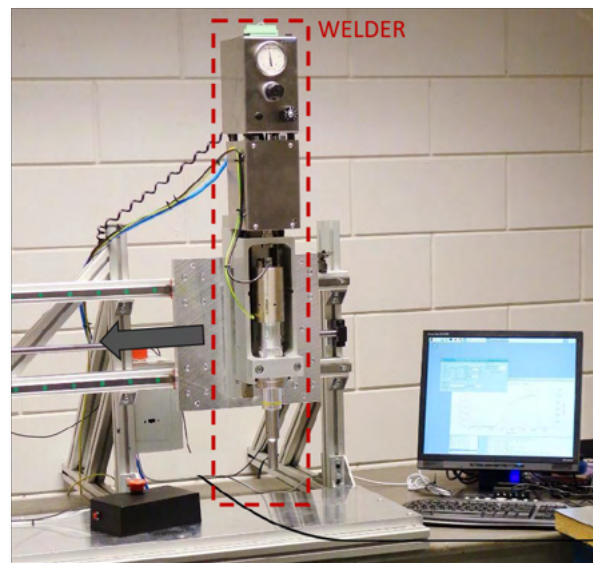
Continuous US welding device prototype [Van Beurden, 2015]
